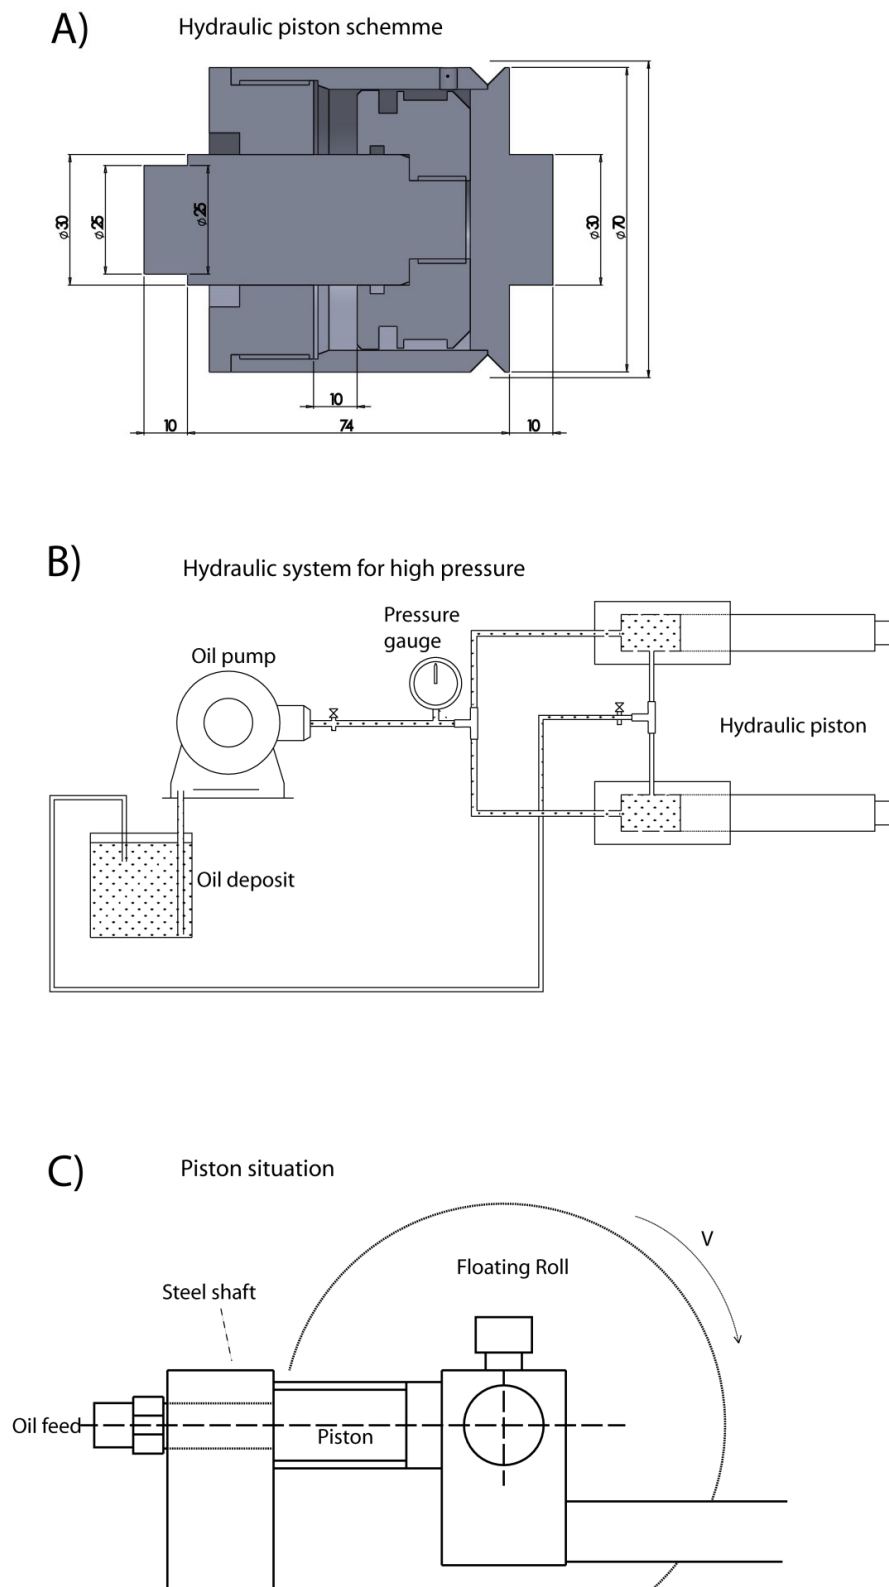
High-pressure design. A) Piston design, B) Hydraulic system, C) Position of the piston related to the floating roll.
